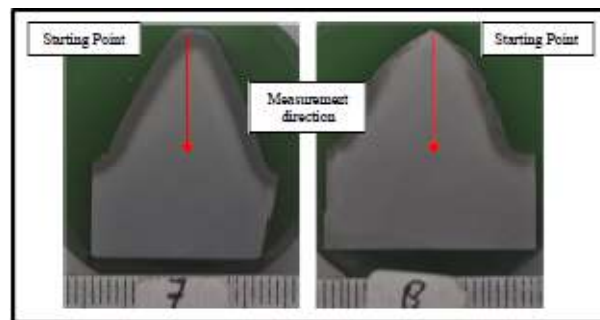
Cross section figure of initial pitting sample (left) and fractured sample (right)
